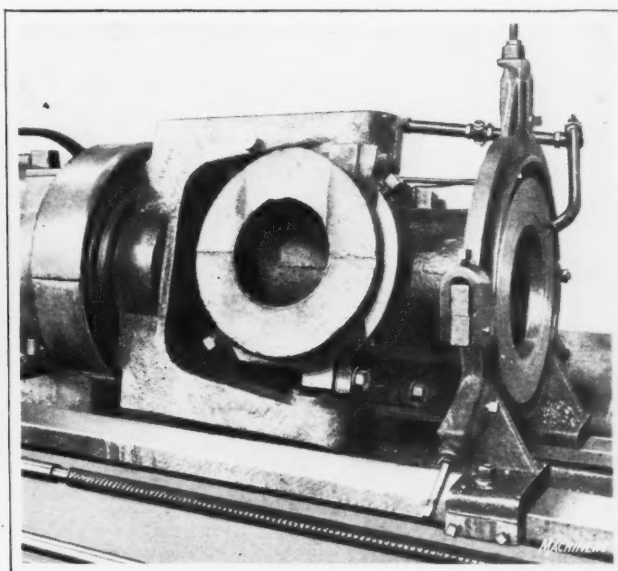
Steadyrest used in Conjunction with the Chuck to support Long-necked Valves
